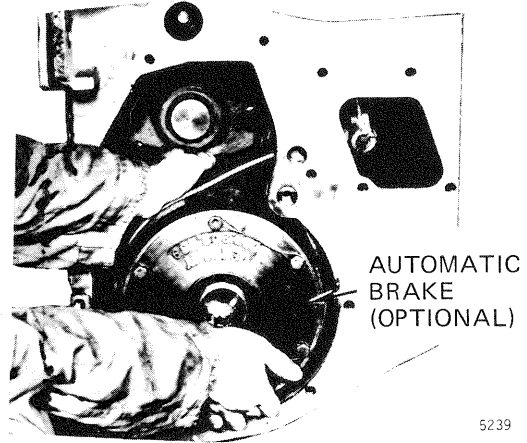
REMOVAL OF DRY BRAKE AND AUTOMATIC BRAKE (Sheet 1 of 2)
